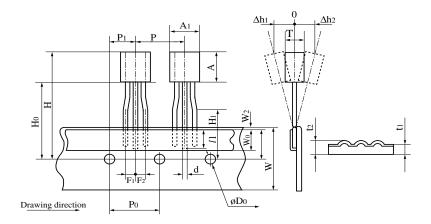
TO-92 Type Package Taping-Dimensions (Ammunition pack)
